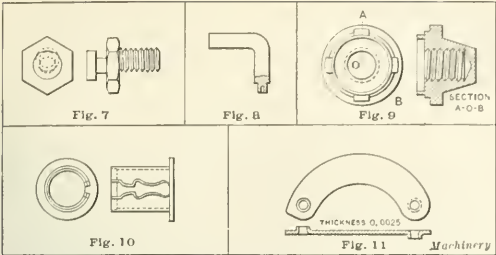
Eccentric Screw; Fig. 8. Plate-holder Slide Lock; Fig. 9. Tripod Nut; Fig. 10. Spool Center Eyelet; Fig. 11. Diaphragm Wing
